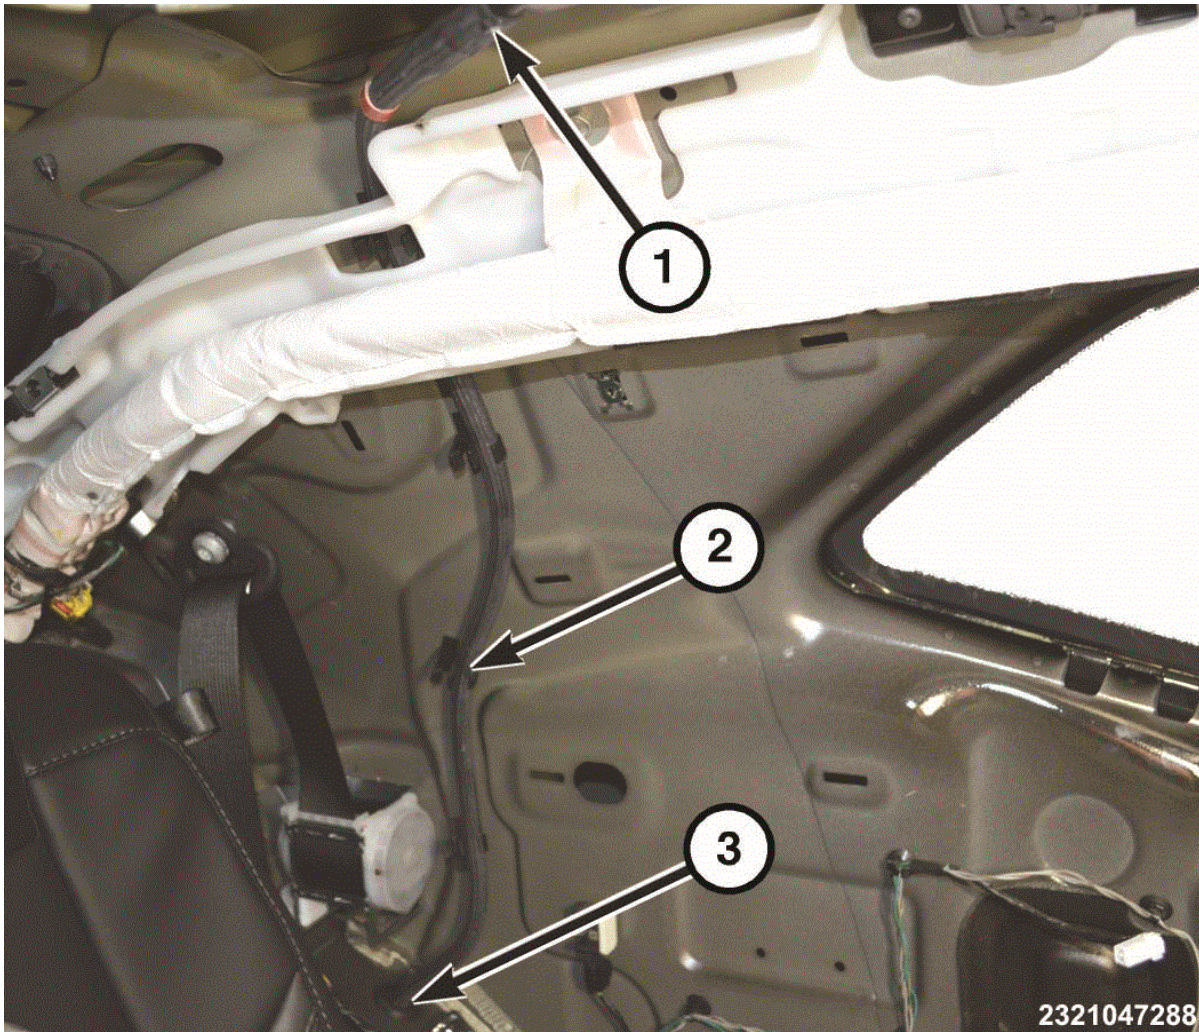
Sunroof, Retaining Clips & Drain Tube Grommet
